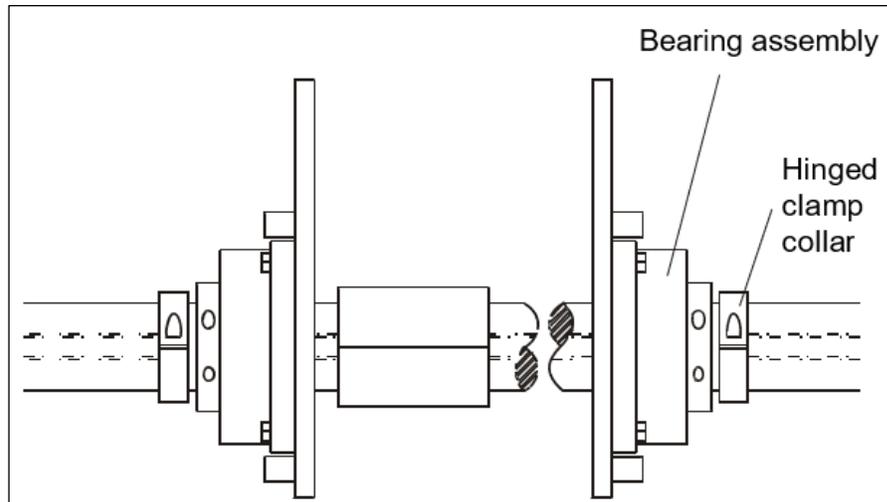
ID-MOUNT BEARING SUPPORT ASSEMBLY (LEFT) AND HINGED CLAMP COLLAR (RIGHT)
